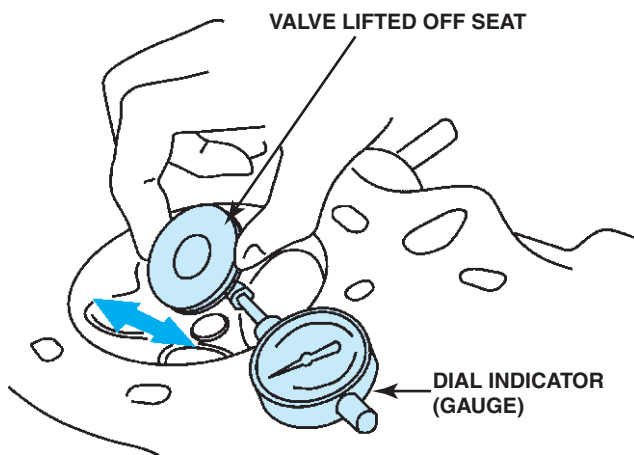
Measuring valve guide-to-stem clearance with a dial indicator while rocking the stem in the direction of normal thrust. The reading on the dial indicator should be compared with specifications, because it does not give the guide-to-stem clearance directly. The usual conversion factor is to record the reading on the dial indicator and divide by 2 to obtain the valve guide clearance. The valve is usually lifted off its seat to its maximum operating lift.
